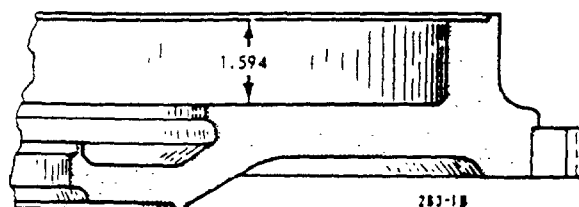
Flywheel Rubbing Surface-to-Clutch Cover Bolting Surface Dimension
